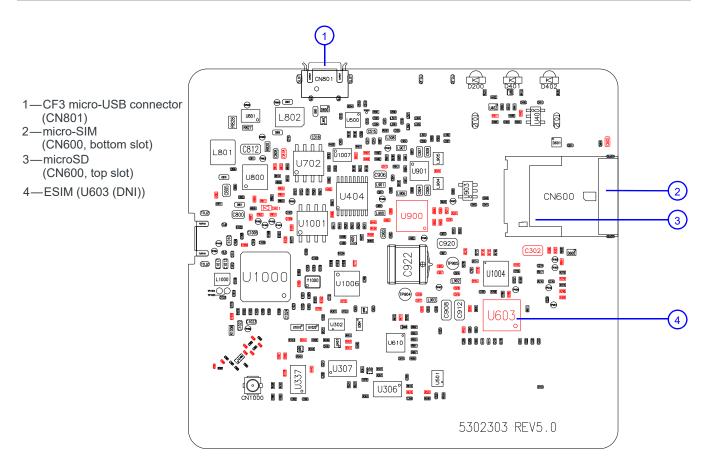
mangOH Red Assembly - Bottom Side Connectors
